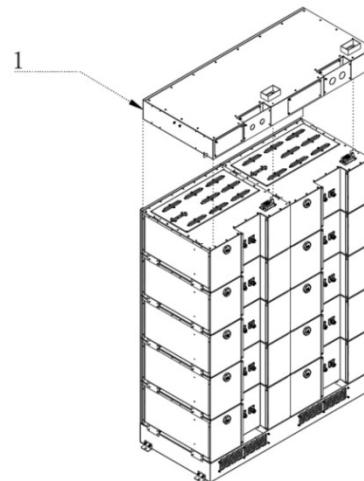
Air Duct/AC Unit Mounting Position
